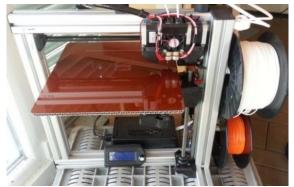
Assembled 3D-printer kit used for the manufacture of the travel
